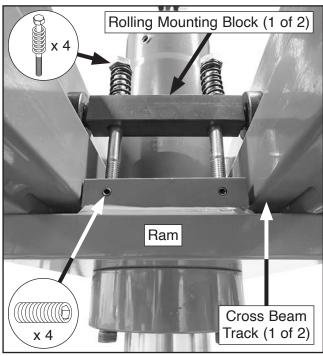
Inserting fasteners through rolling mounting blocks.
